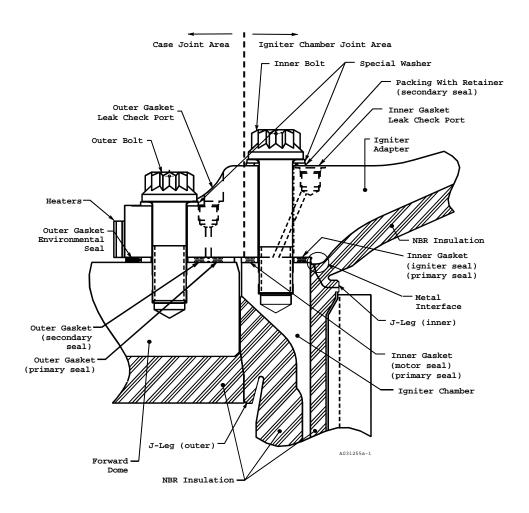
Igniter Adapter-to-Chamber Joint and Igniter Adapter-to-Case Joint
